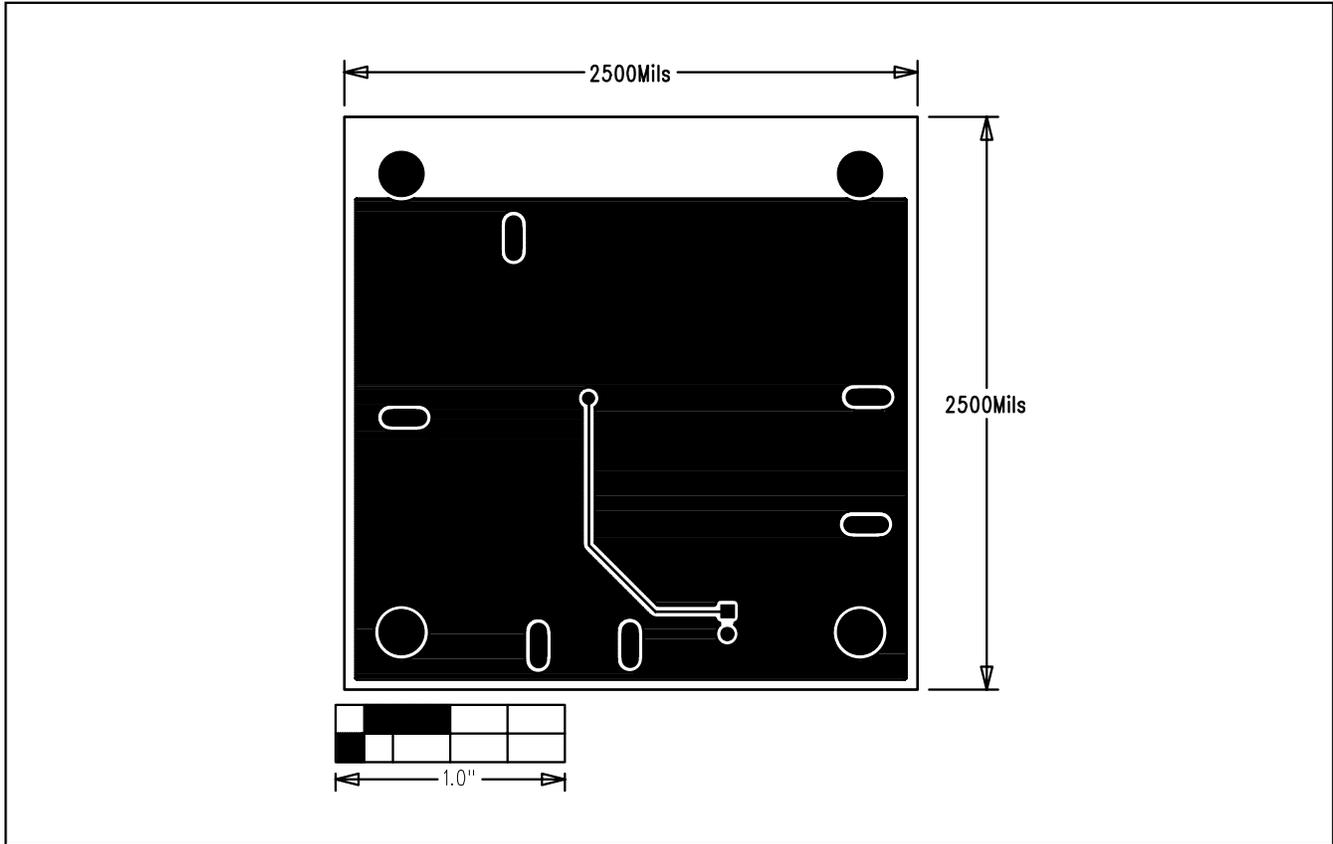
MAX8808 EV Kit PC Board Layout—Solder Side
